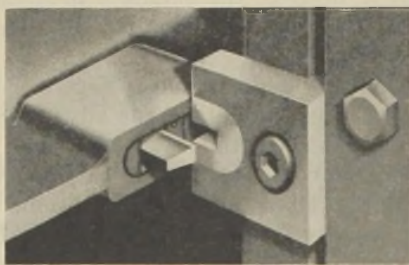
Close-up view of precision-made Griductor tooth, mounted in rotating disc.
